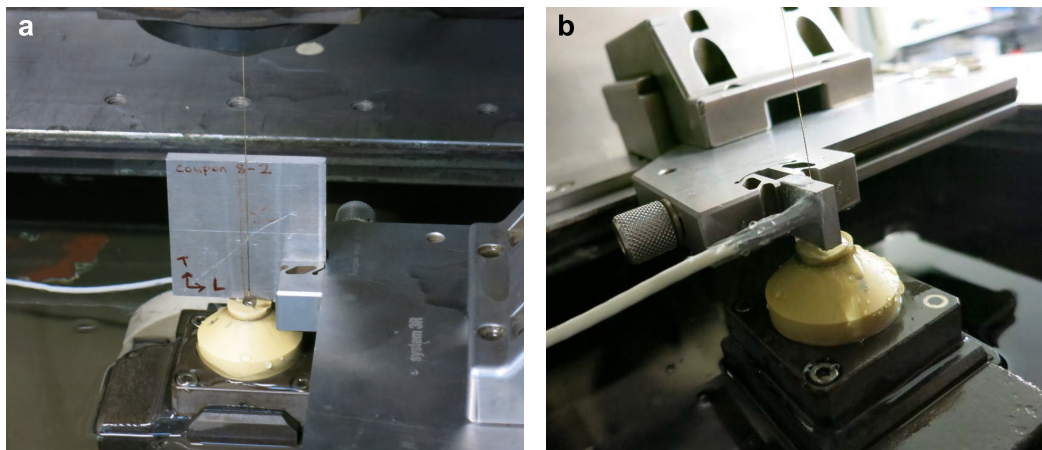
EDM setup used for slitting measurements. (a) Coupon 14. (b) Coupon 1:2-L B. Visible is the wiring to the strain gage and the protective coating used to isolate the strain gage from the bath.
